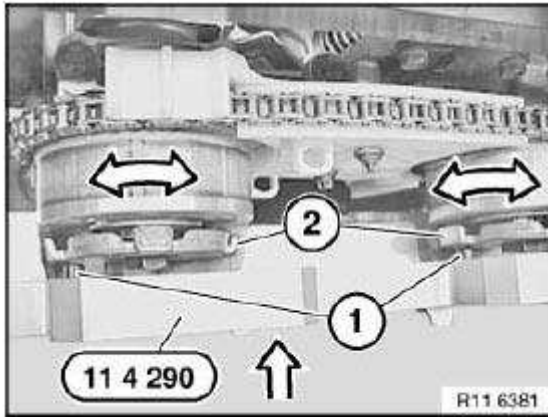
Sensor Gears, Locating Pins And Special Tool (11 4 290)
